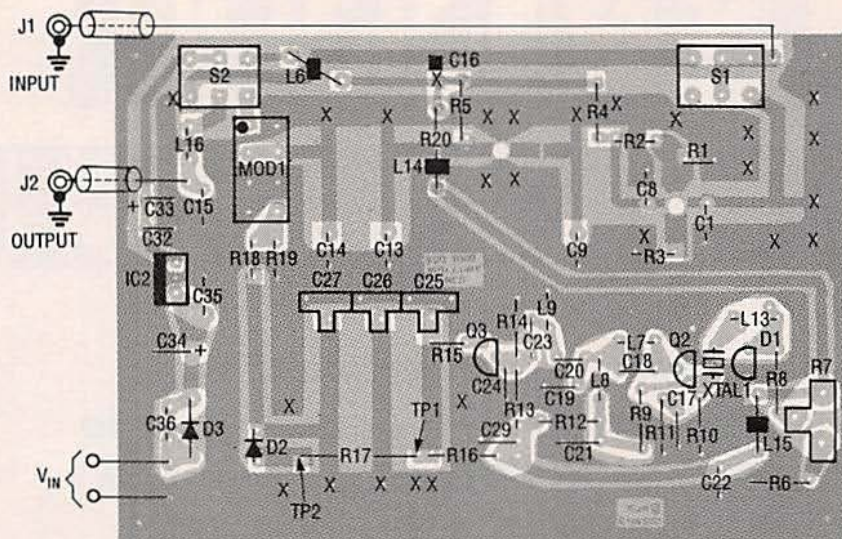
PARTS LAYOUT. Note that a piece of wire must be inserted and soldered on both sides of the board anywhere you see an "X." The chip components mount on the solder side as shown in Fig. 3.
